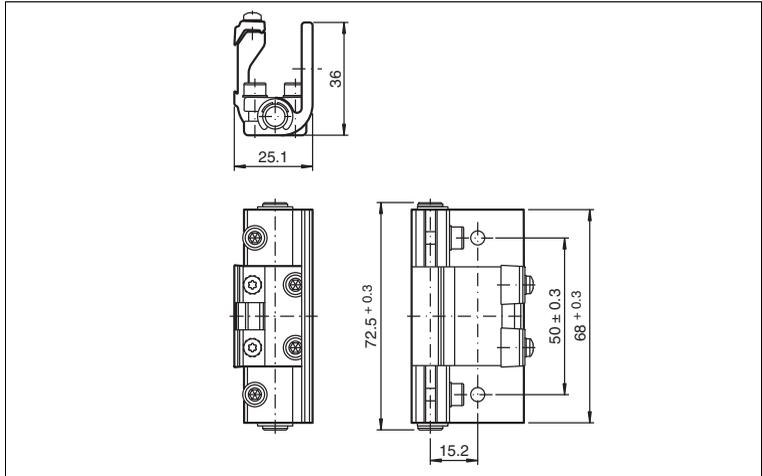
Dimensional drawing of mounting aid OMH-SLCT-05
